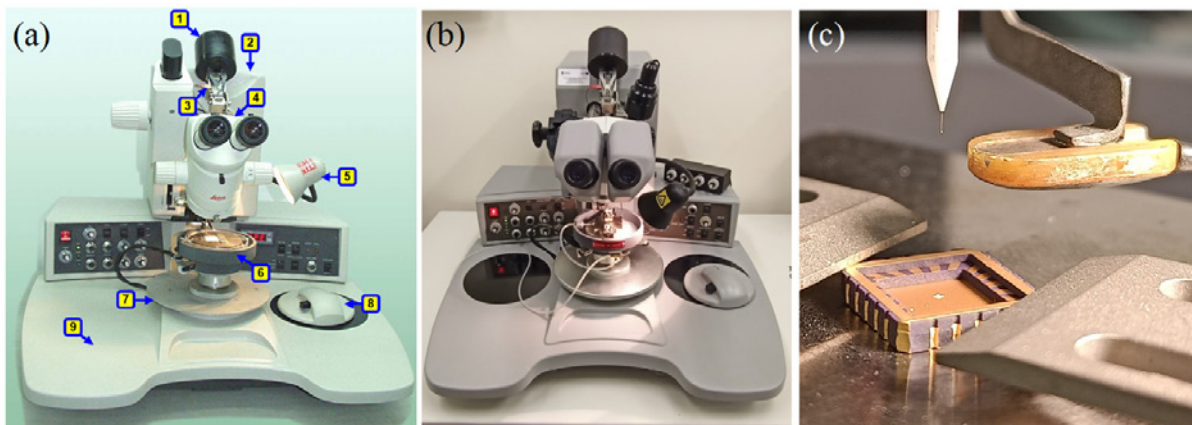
The photos of the (a) wire bonder machine [283], (b) wire bonder machine at the Faculty of Physics of the University of Warsaw and (c) the zoom of the wire bonder machine sample holder with the needle threaded with a  $20\text{ }\mu\text{m}$ -thick golden thread and sample chip carrier.
